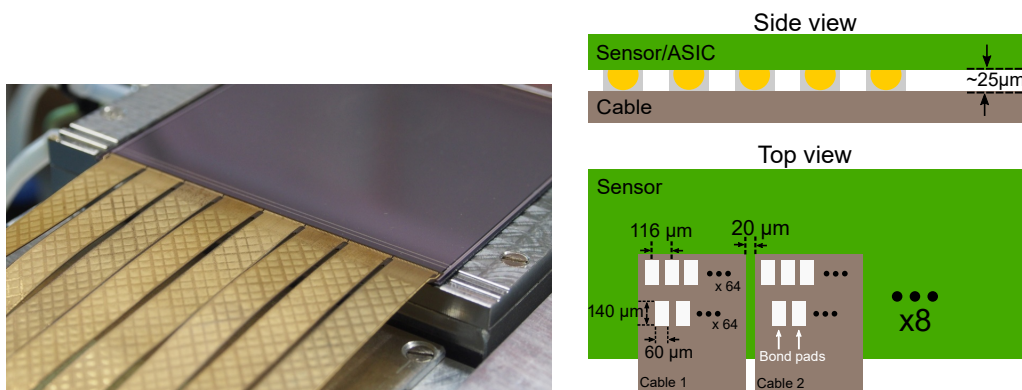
Full single-sided assembly of a 6.2 cm \times 6.2 cm sensor and eight copper microcables (left). Side and top view drawings showing the dimensions that are important for module assembly (right).
